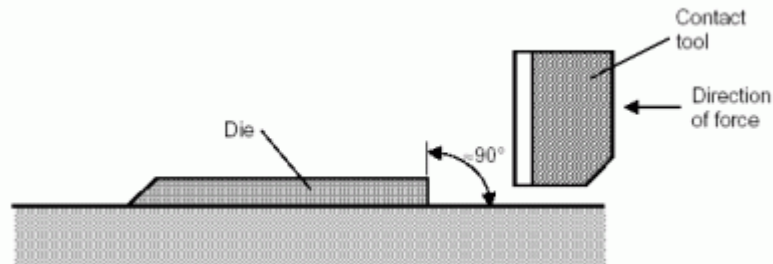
Test Set-up for Die Attach Shear Testing [52]
